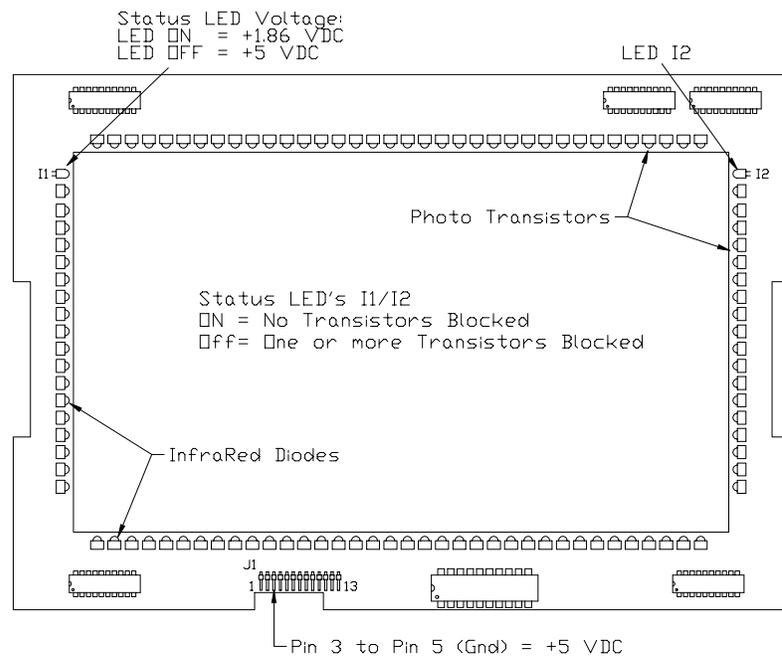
IR Touchpanel PCB Voltage Test Points
